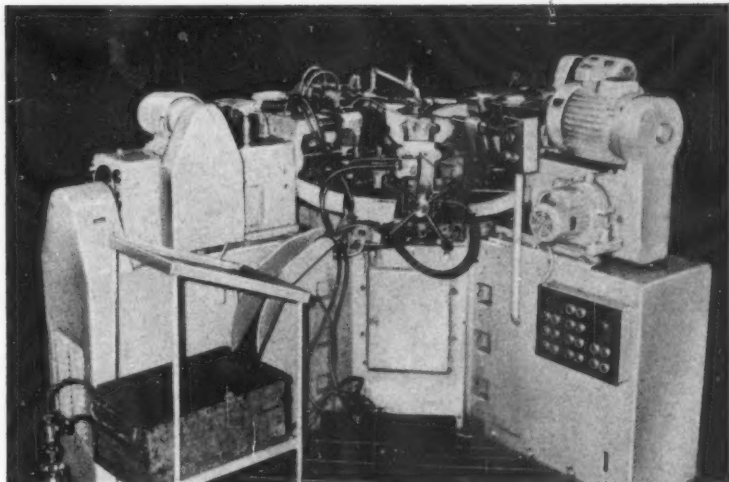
Special-purpose, Multi-station, Rotary-head Machines, of the Type Here Shown, are Employed for Facing and Drilling Operations on "Pivoted" Tools
